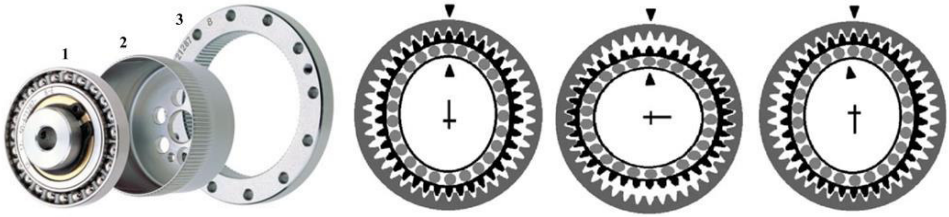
Cylindrical strain wave drive unit's main elements and working principle flexible bearing and wave generator (1), wave gear (2), rigid gear (3) [1].
